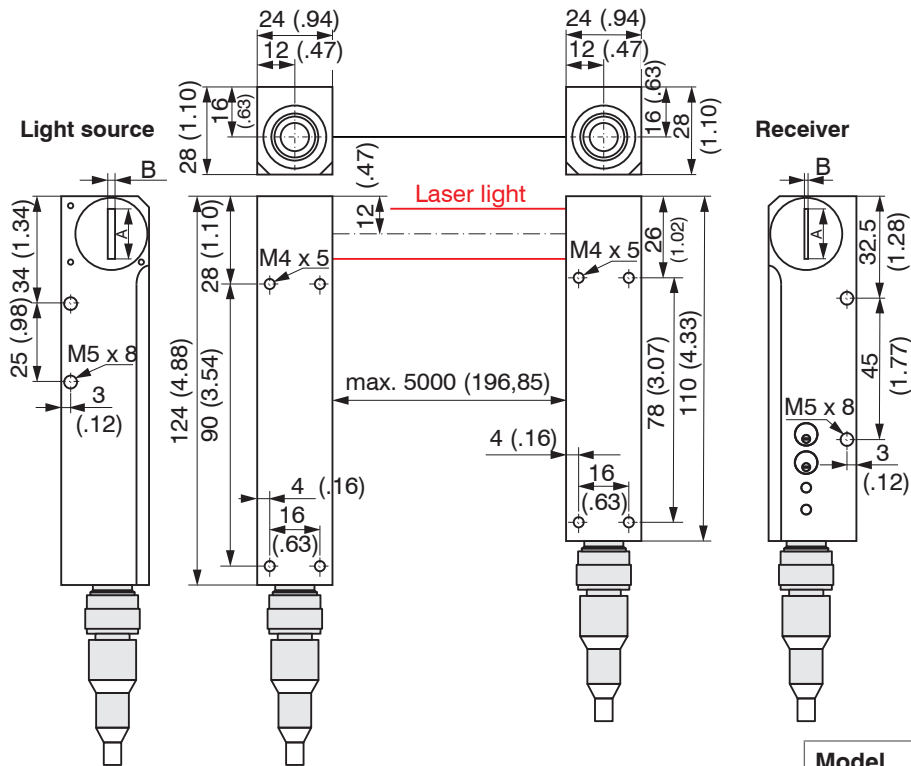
dimensional drawing ODC 1201, ranges 20/30 mm, dimensions in mm, not to scale
